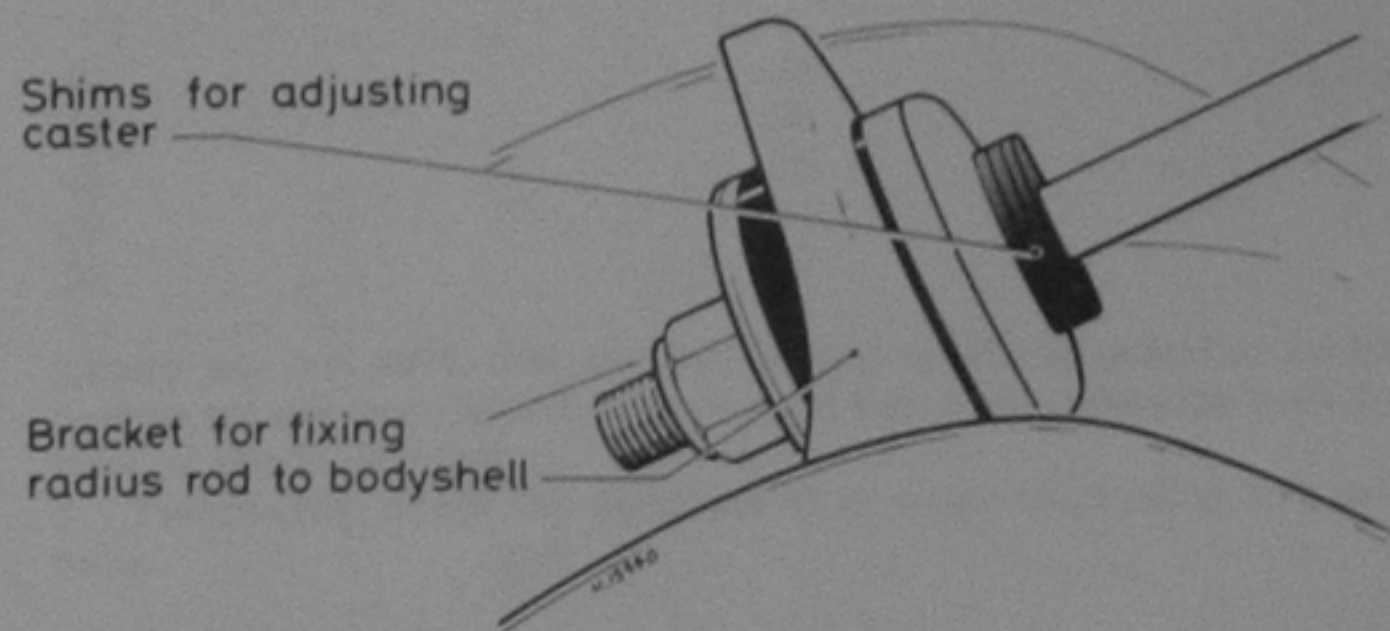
Location of castor adjusting shims (Sec 12)
